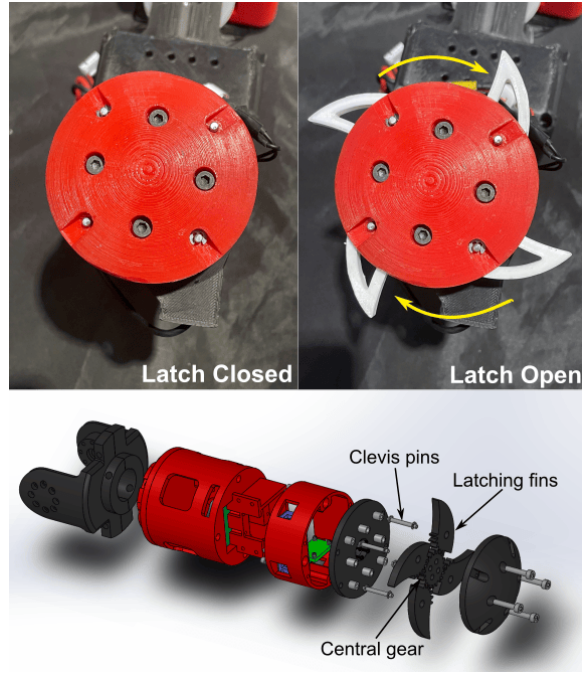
(Above) Closeup view of the head with actuated fins. (Below) Expanded view of the head module.
